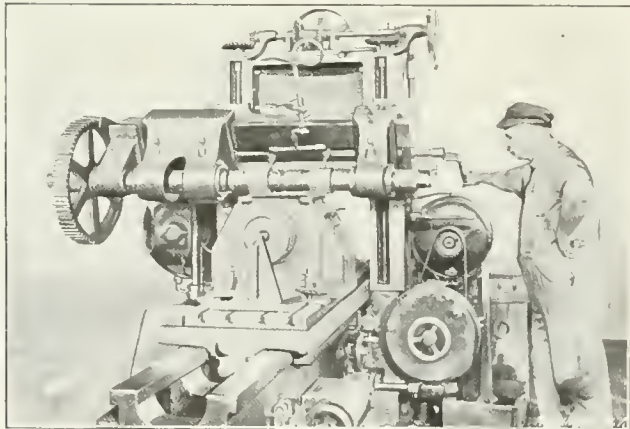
Horizontal Milling Machine set up to mill the Feet of Motor Frames
